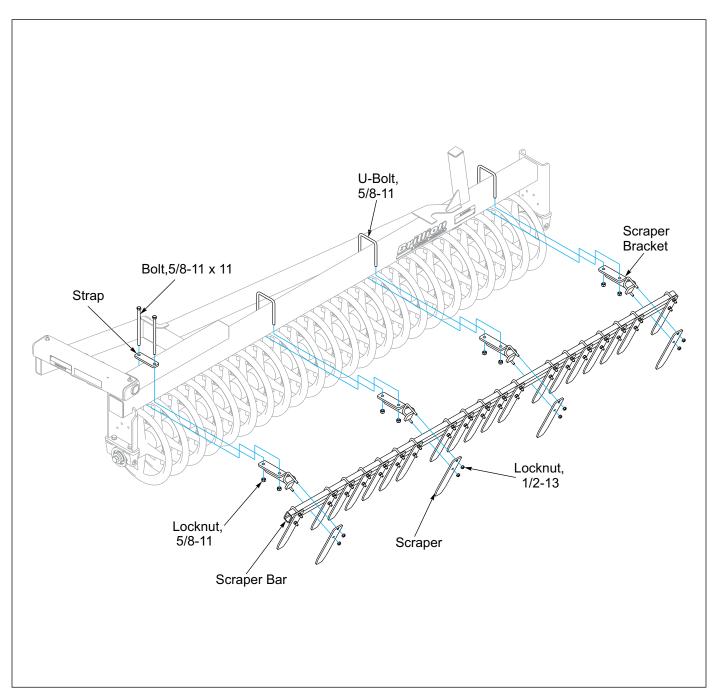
Wing V-Wheel Scraper Installation - Optional
